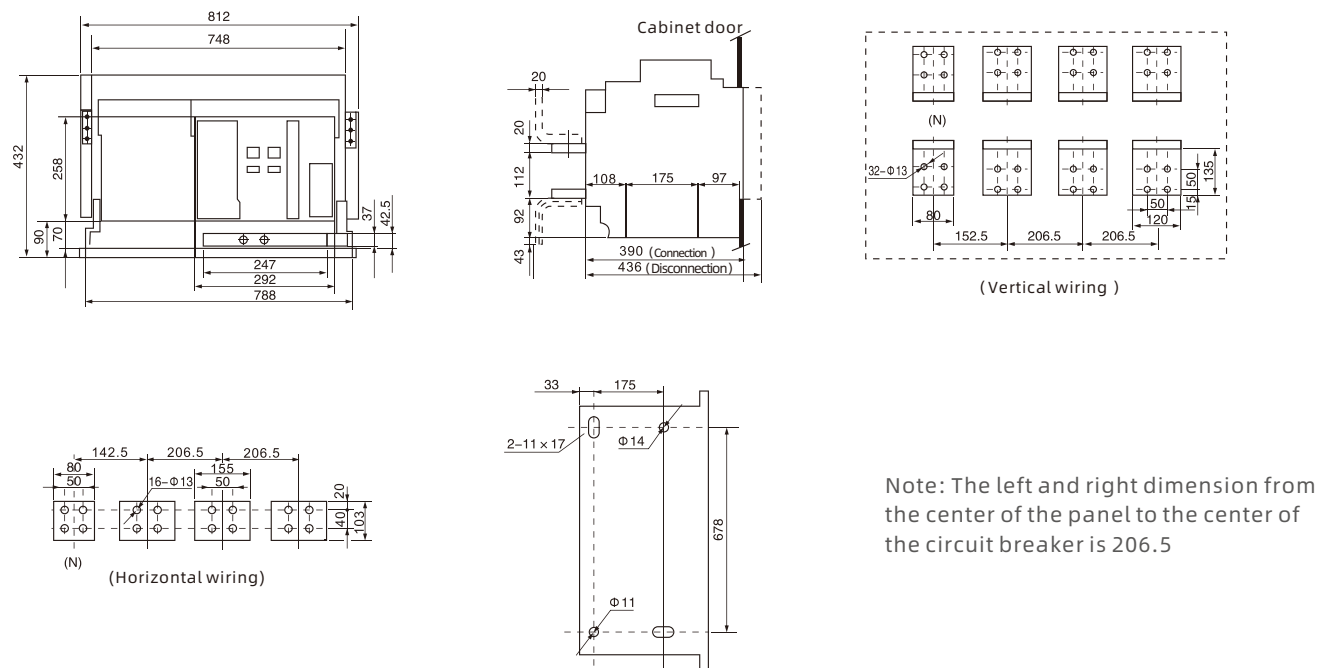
Draw-out circuit breaker overall and installation dimensions (ARW1-4000/4)
